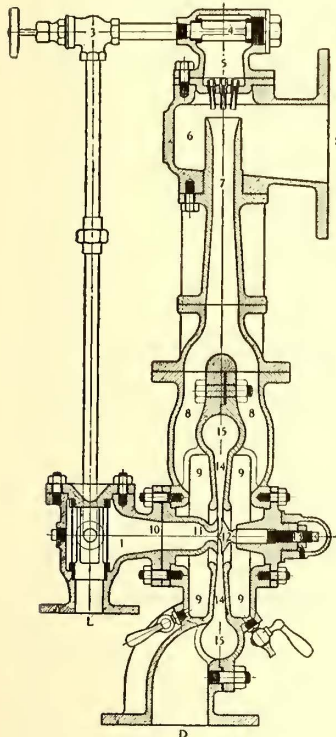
CROSS-SECTION OF STEAM-EJECTOR CONDENSER AIR PUMP
